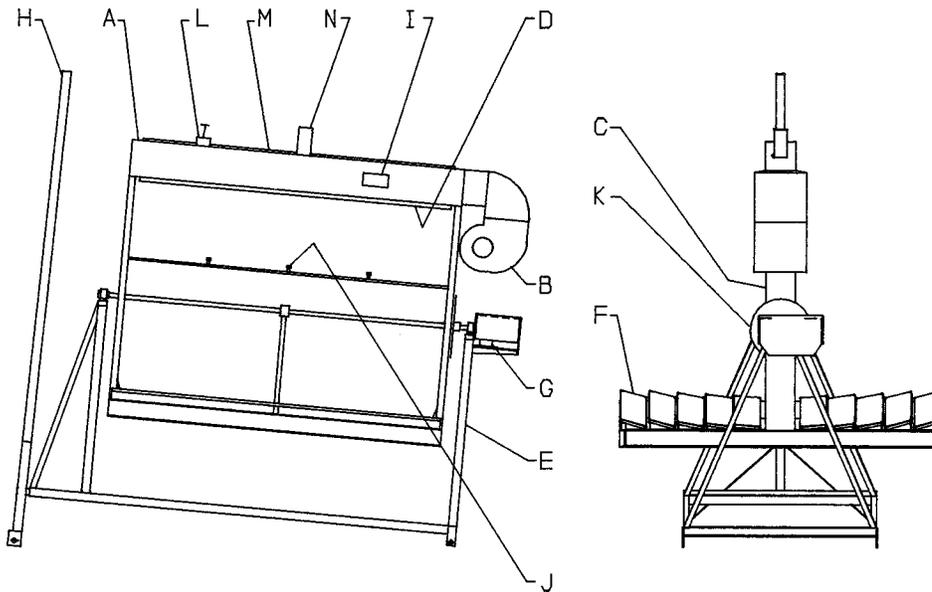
Schematic of Fresnel-Reflecting Concentrator Accelerated Weathering Machine Single Axis Tracking
